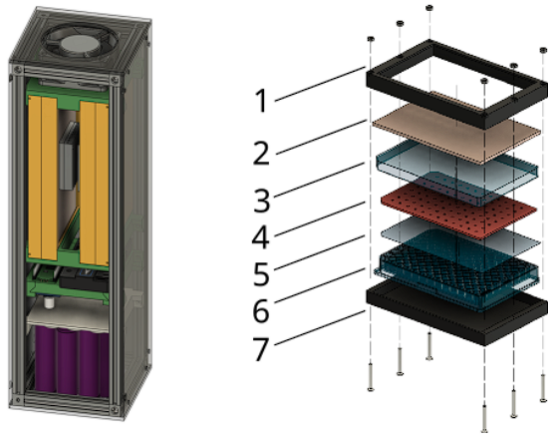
CAD model of an assembled payload; exploded view of a well-plate's sealing frame.
